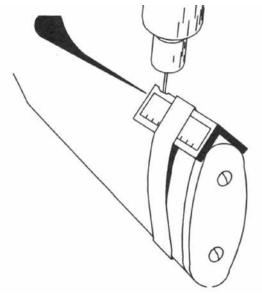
When using the "V" jig for swivel installation, simply place the jig over the edge of the stock so that it's flush with the butt. Secure the jig in place with the wide rubber band that comes with the kit.
